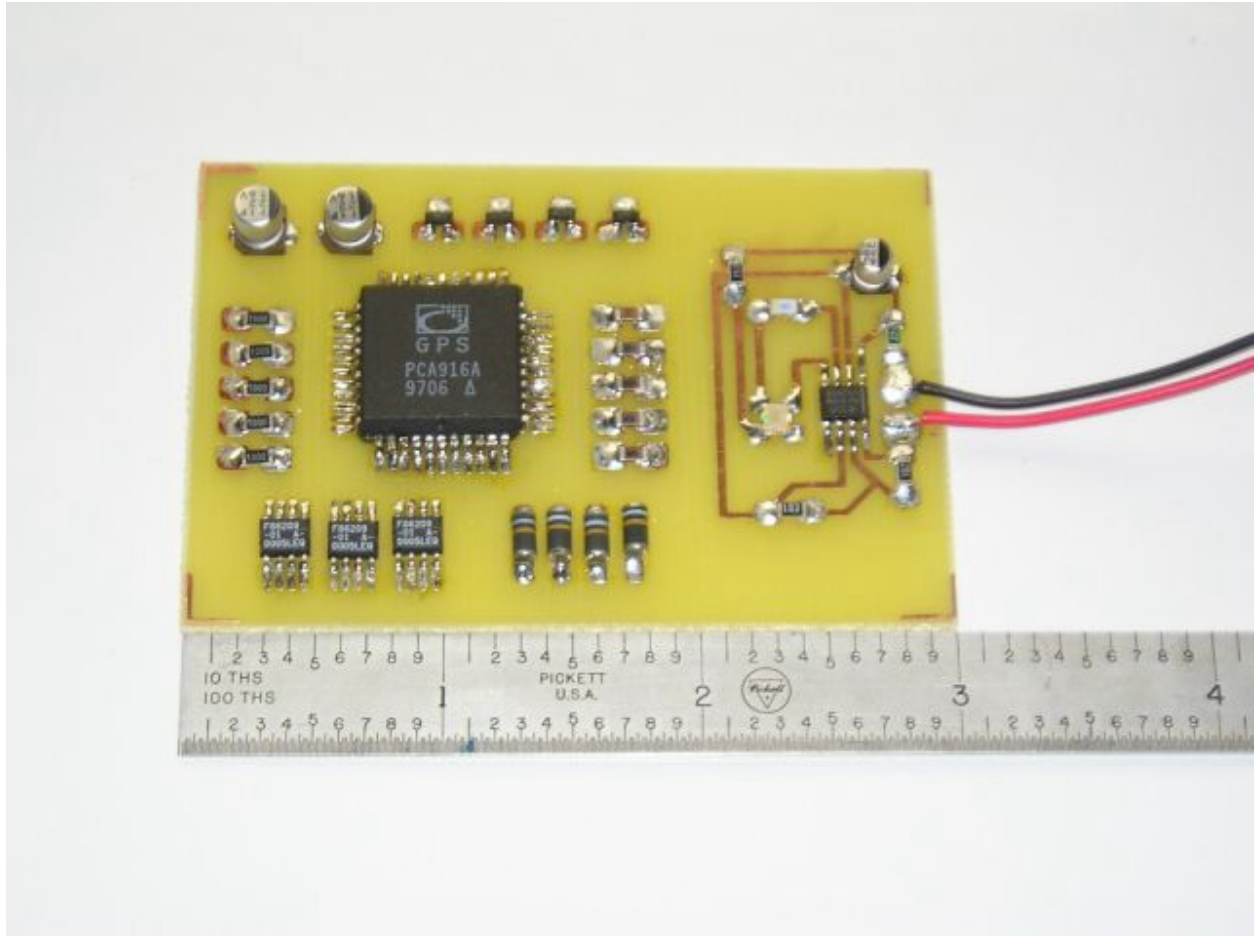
The Chaney Electronics C6719 'Learn to Solder' kit fully assembled. An excellent way to become familiar with handling and soldering surface-mount components.
